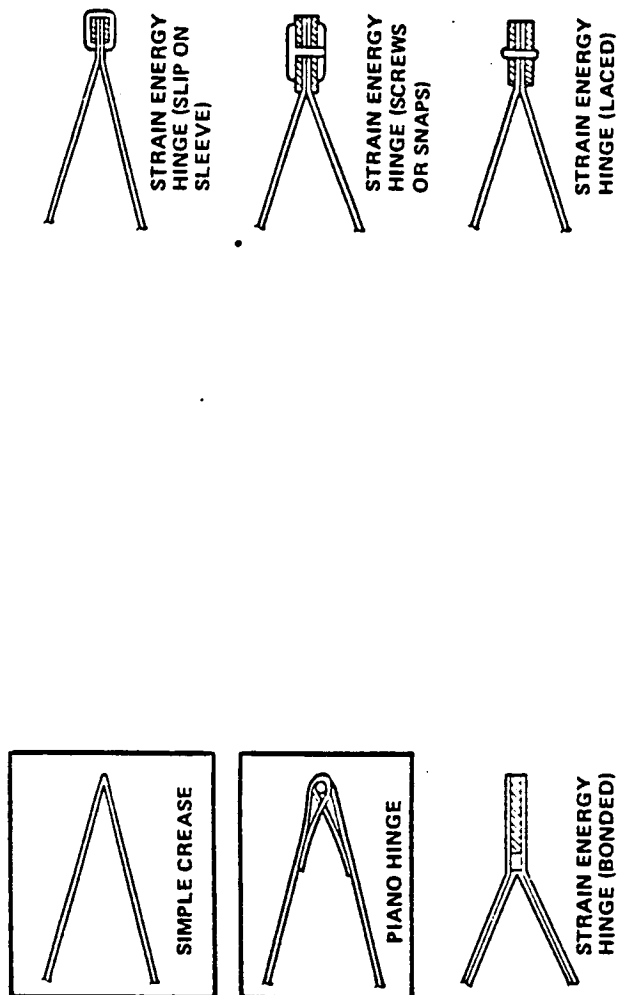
Candidate Blanket Assembly Hinge Designs
